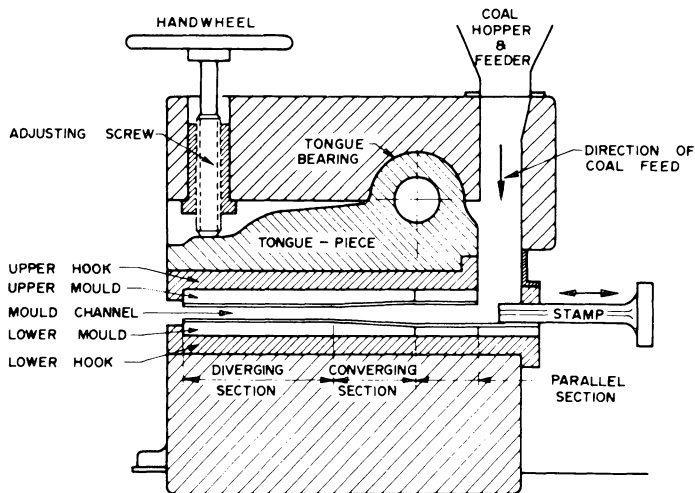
Diagram of the head section of a piston-type extrusion briquetting press [17].
